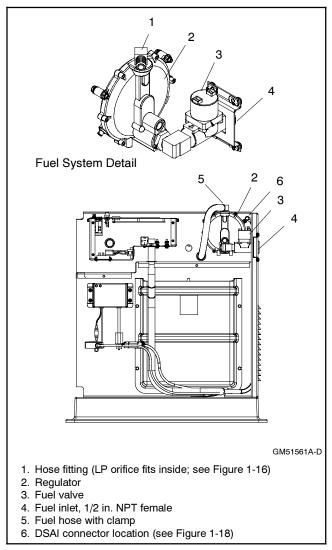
Fuel System Components, Air Inlet Side, 17/18 kW Shown
